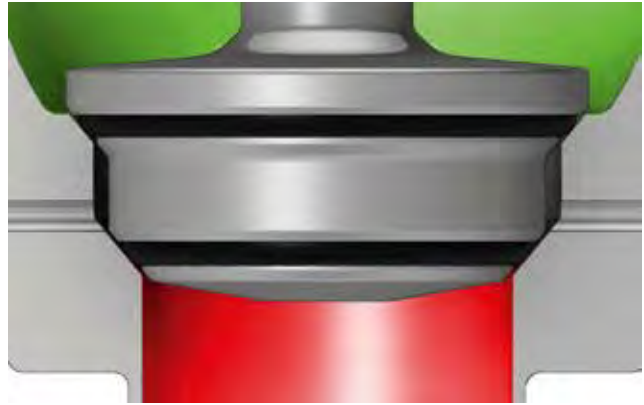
Seat seal arrangement: axial top – axial bottom (closed).
